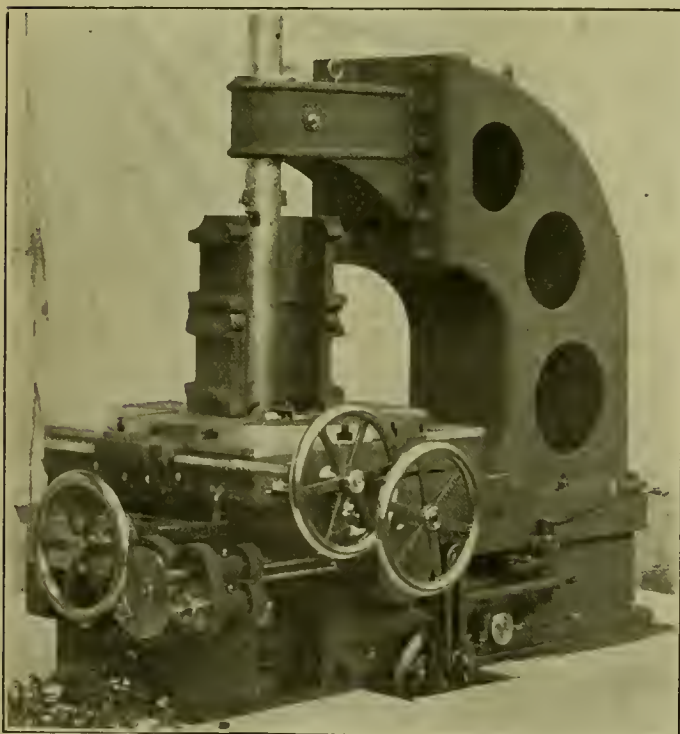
30-INCH DRAW-STROKE SLOTTOR.—BAKER BROS.
